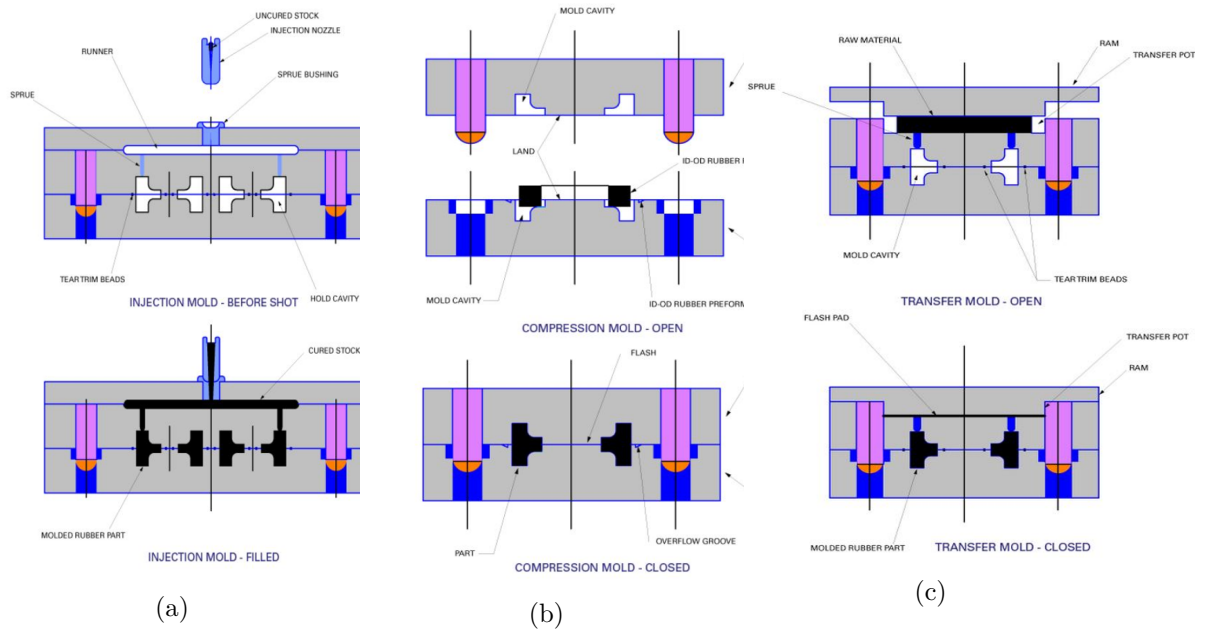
Figure 4: Injection Molding (a), Compression Molding (b) and Transfer Molding (c)
